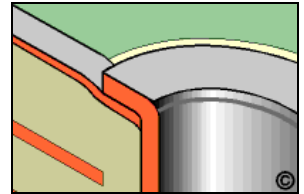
The eyelet flange can be used to secure a new circuit in place.
